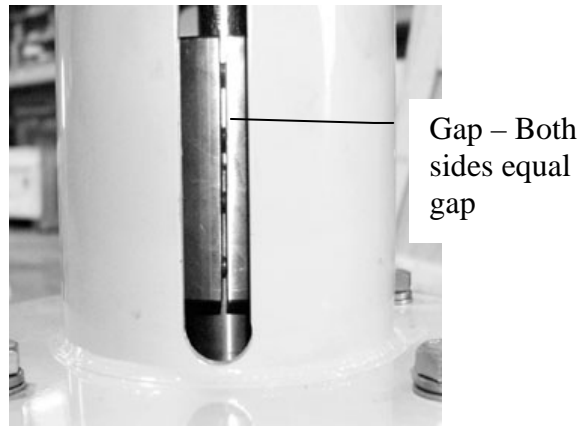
Add or Remove Fender Washer(s) or Shim Spacer(s) to Change Seal Compression
